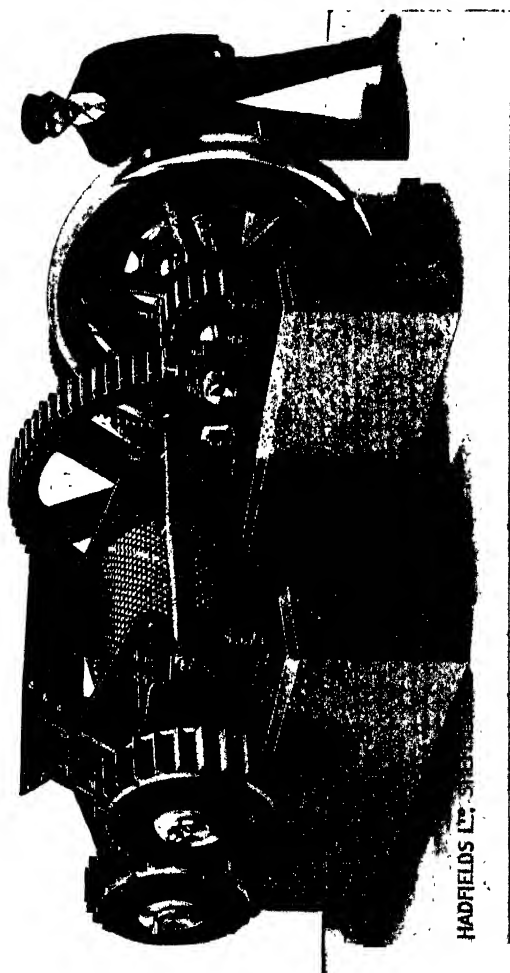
Hadfields' Toothed Crushing Rolls.
